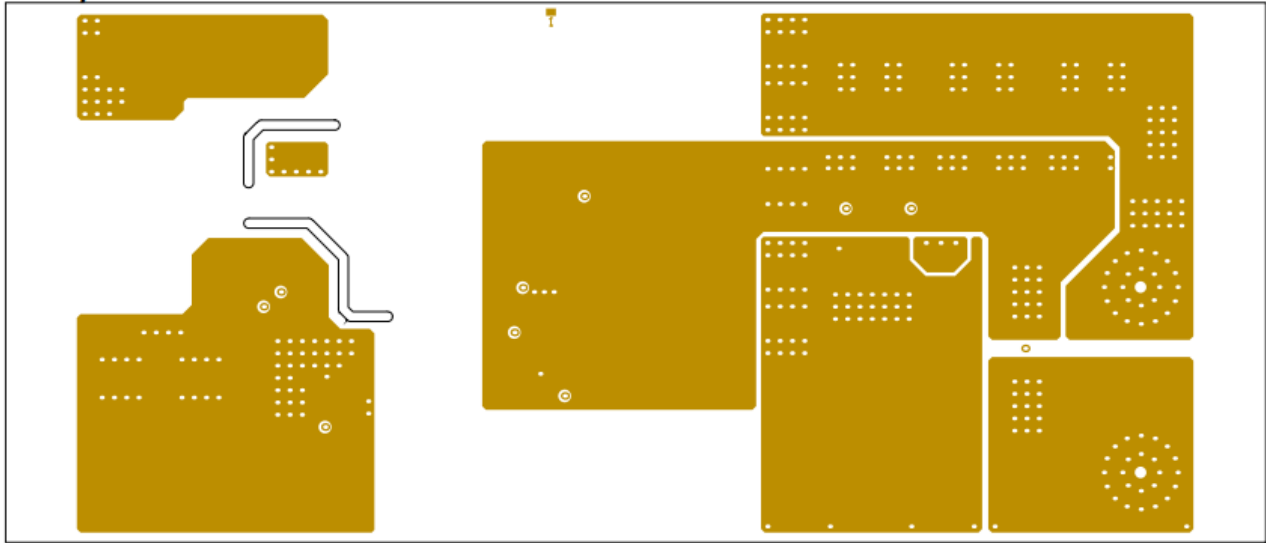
DER-952Q Mid-Layer 1 PCB Layout
